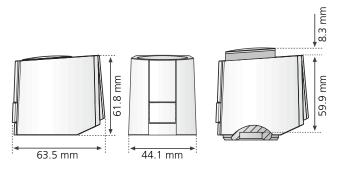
Dimensions, ACTUATOR 0-10V NF, 24V ACIDC
